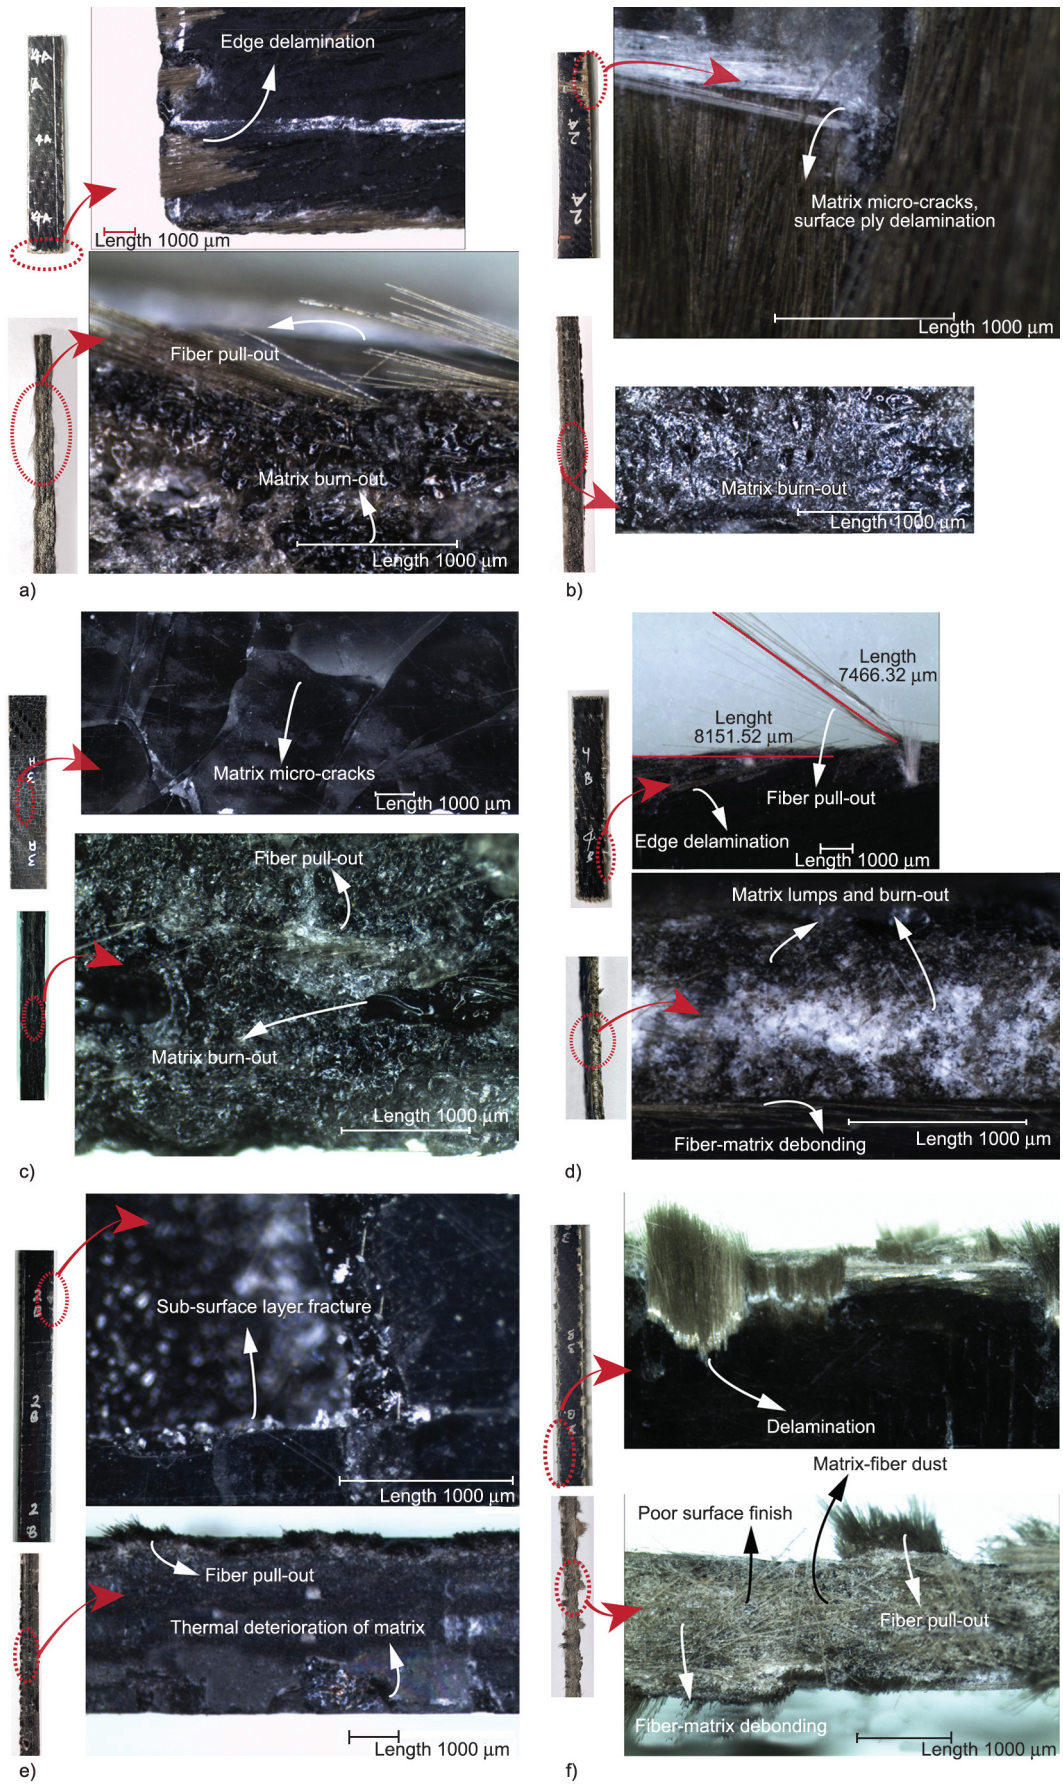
Specimens stereomicroscopy images cut by scroll saw and milling machine: (a) UDLS (b) UDTS (c) BDS (d) UDLM (e) UDTM (f) BDM.
